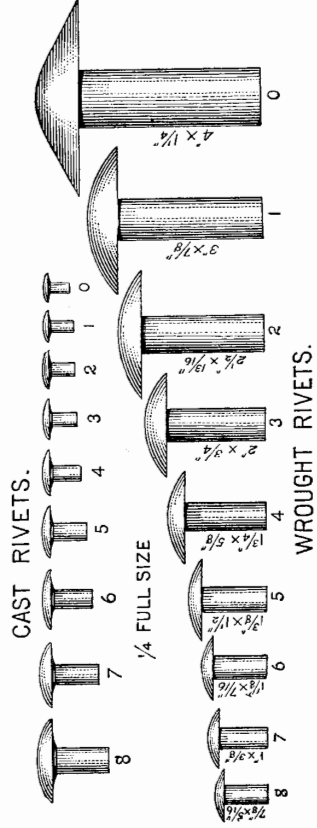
Size and Shape of Copper Rivets, One-Quarter Size.
